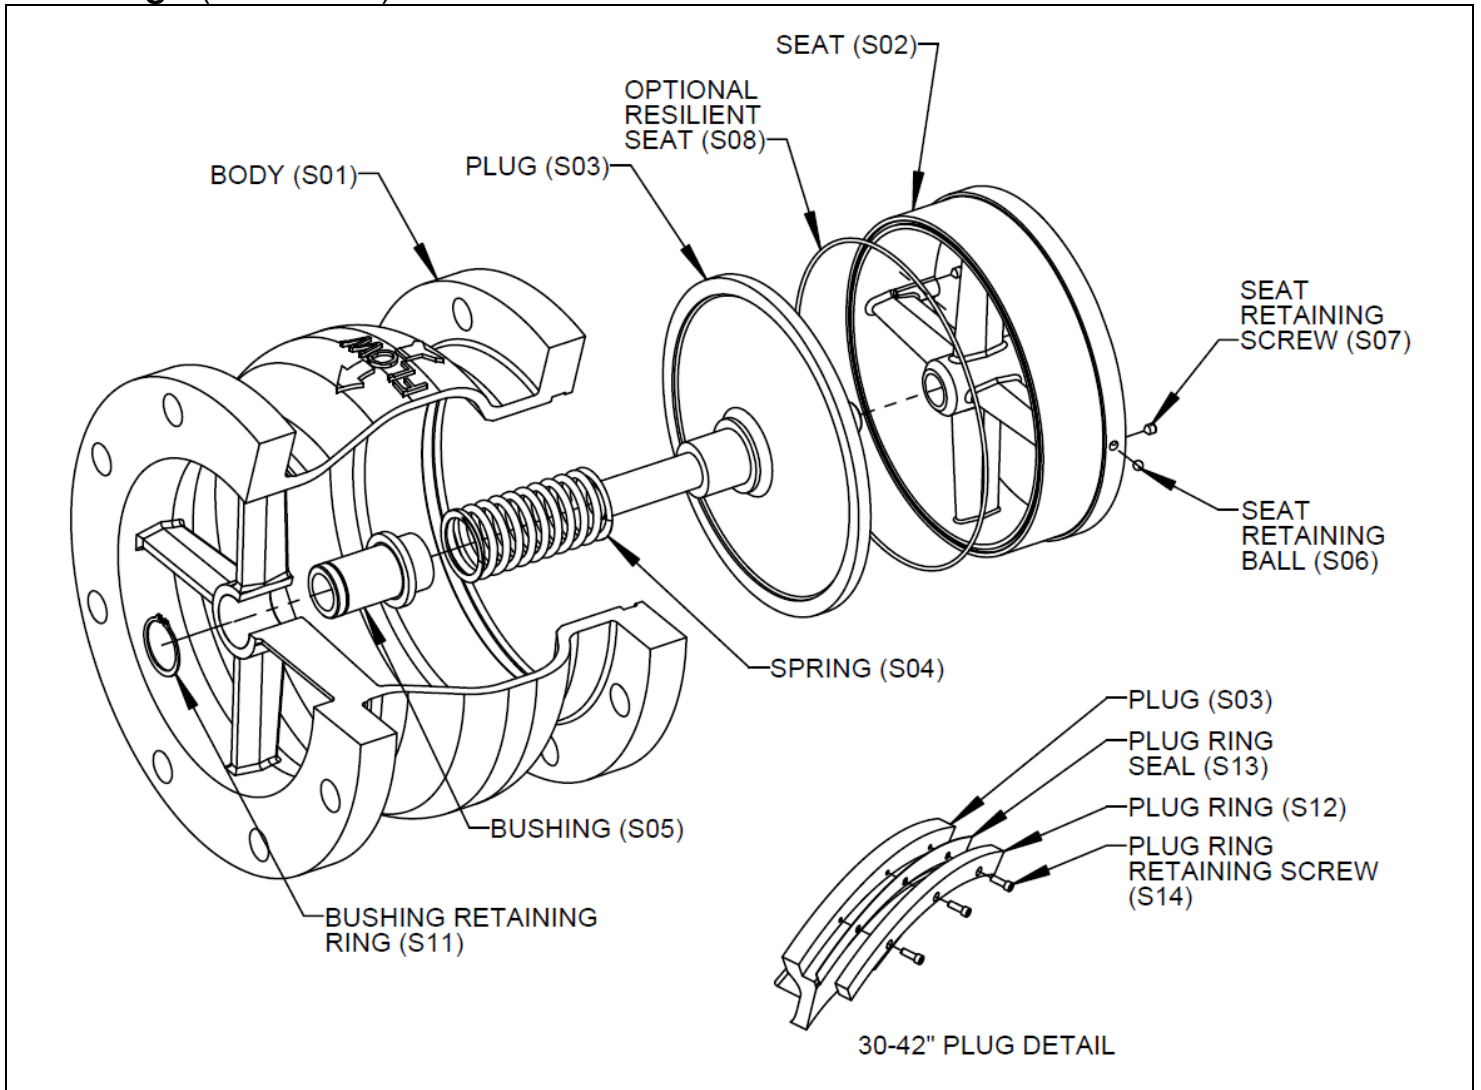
CSC-600A Globe Style Silent Check Valve (Exploded View)
